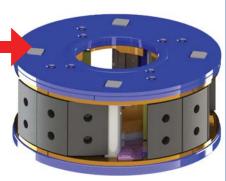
REMCO rotors do not require extensive repair welding of the rotor body. The rotor is protected by one-piece hardened AR steel wear disks, top and bottom. These are smooth, reducing air drag and are easy to replace after providing long wear life.
